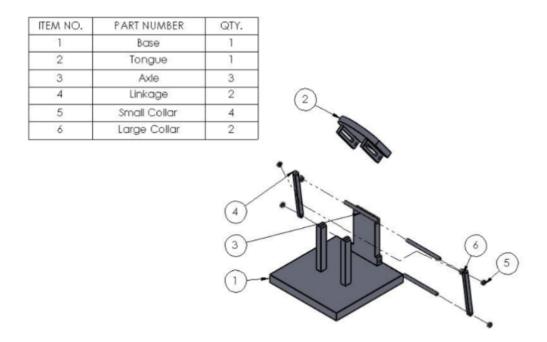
Diagram of Linkage System Components for Assembly. Reproduced as if from [43]. *The figure above shows an exploded view of the a potential linkage system assembly.
